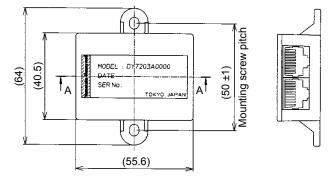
Modular branch unit (Model DY7203A0000) (mm)
